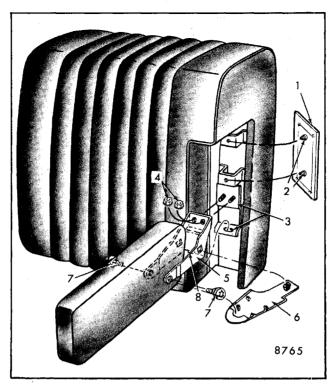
Passenger and Driver Seat Back Center Armrest Installation - Cadillac K Style
